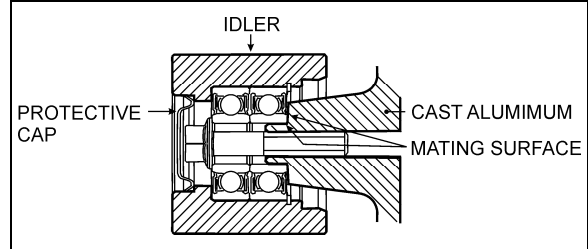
IDLER MOUNTED ON THE CAST ALUMINUM SUPPORT
